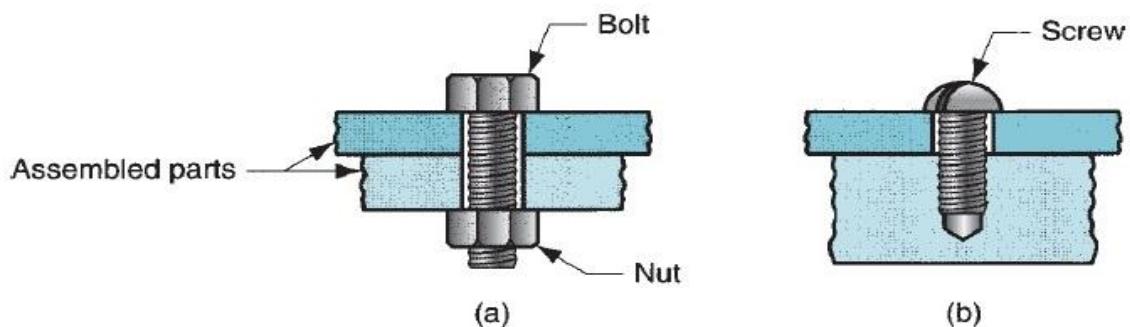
typical assemblies using: (a) bolt and nut, and (b) screw
